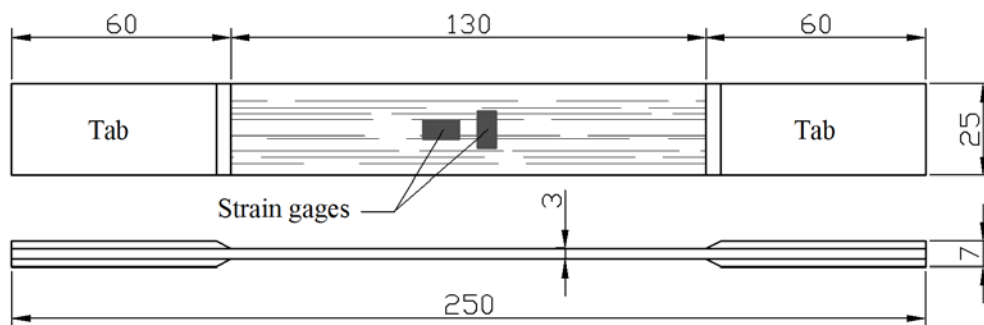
Dimensions of the tensile specimen, types A and C.
